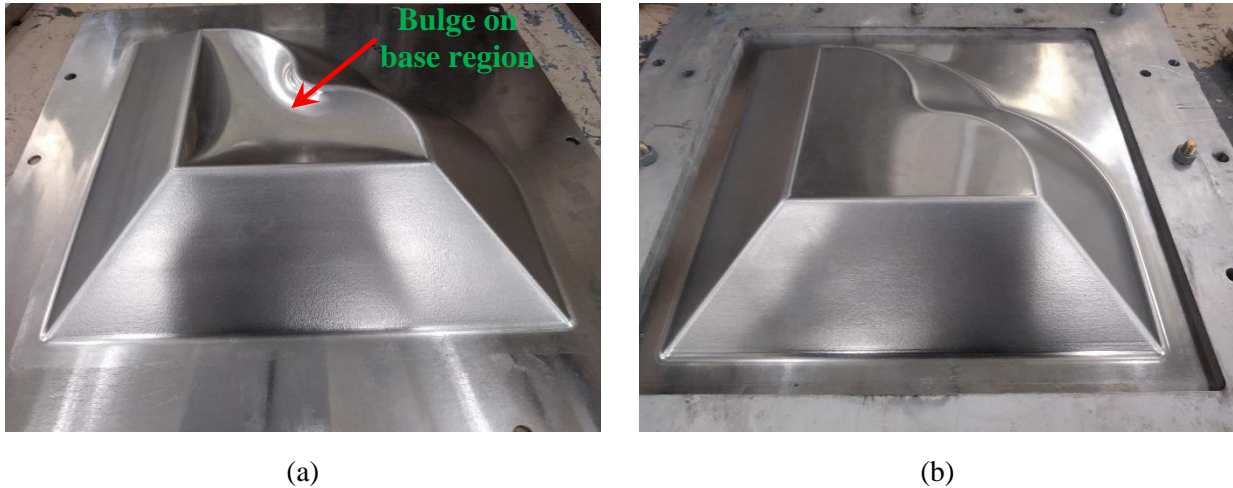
Heart shaped parts fabricated using (a) TPIF process and (b) Hybrid-TPIF process
